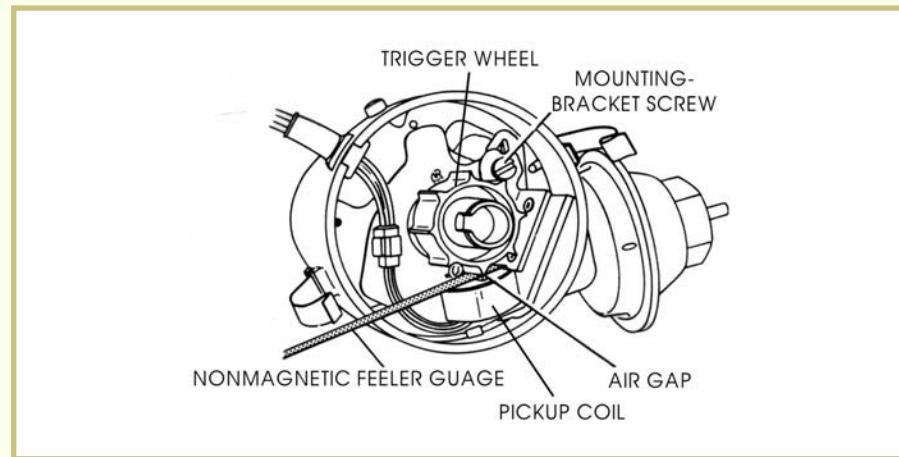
A nonmagnetic feeler gage is used to set the air gap between the trigger wheel and the pickup coil.
